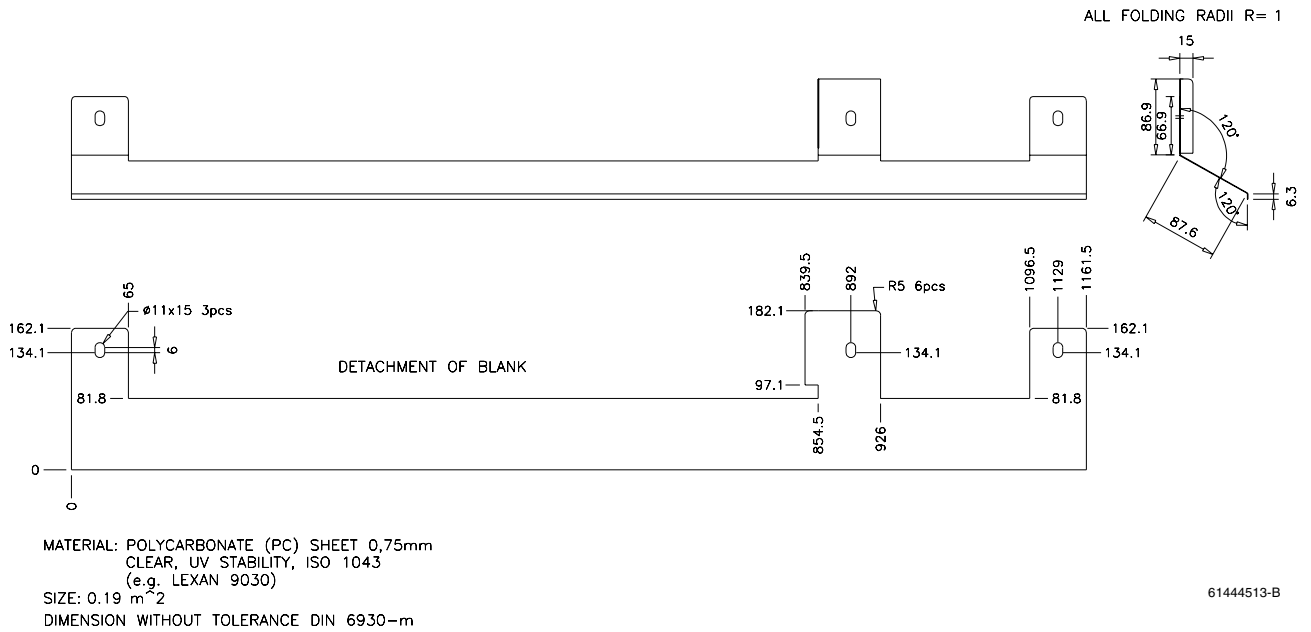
Dimensions of the insulator between the R12i DC busbars.
